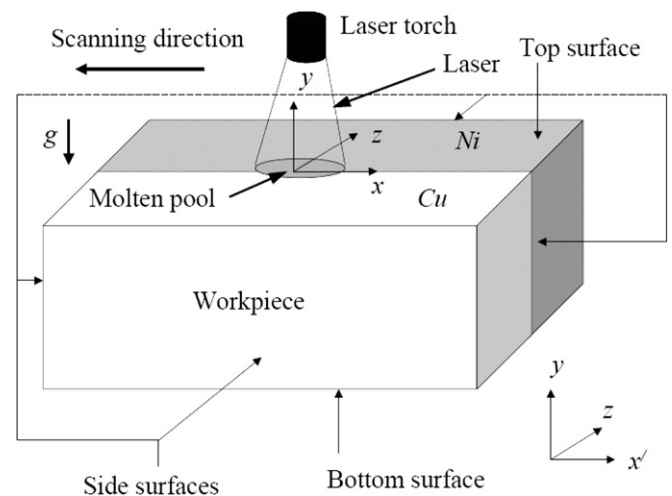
Schematic diagram of laser welding of a Cu–Ni dissimilar couple.
